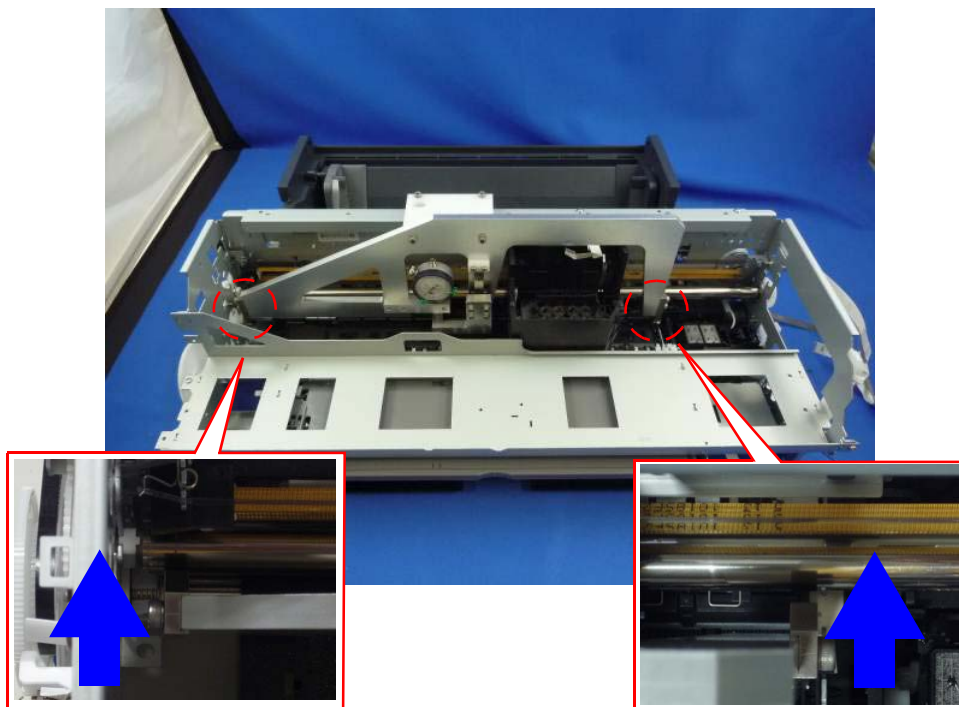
Setting the PF Roller Adjustment Jig (2)
